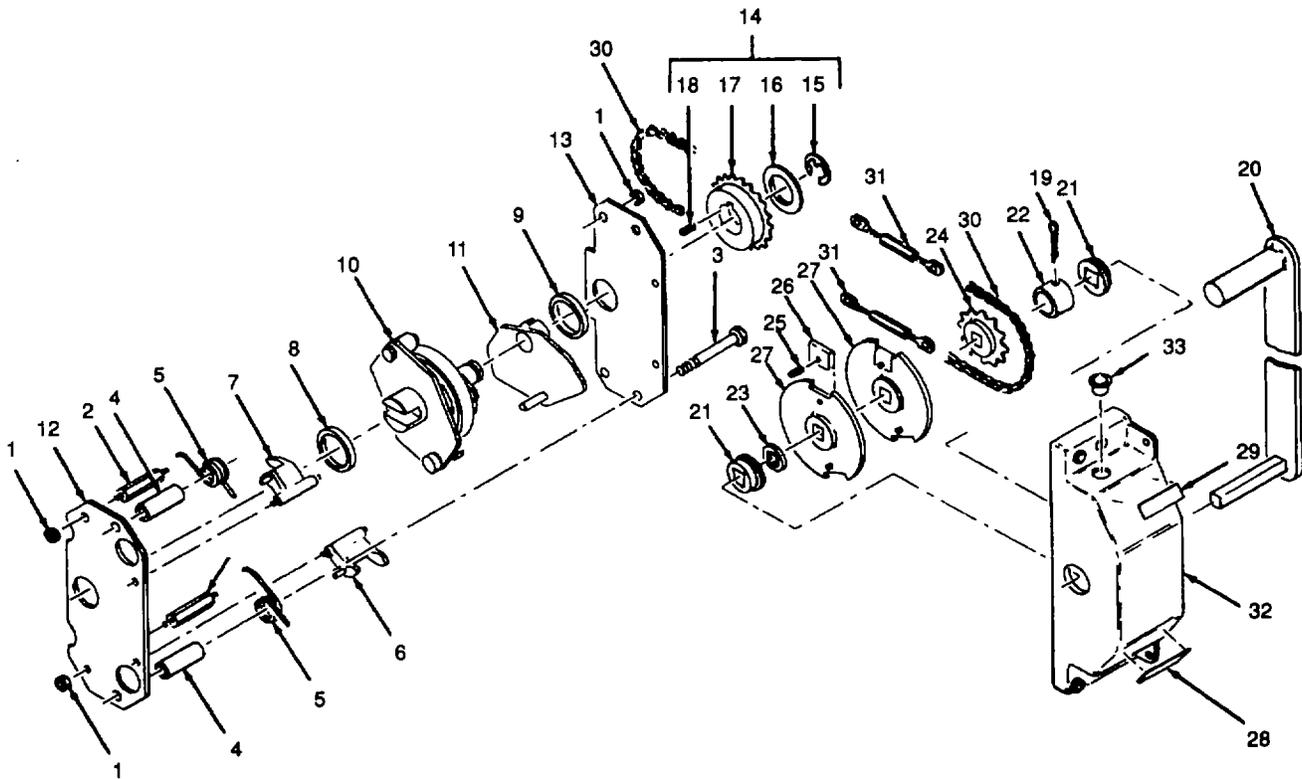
Main Disconnect Switch S120, Operating Mechanism, Exploded View (Sheet 1 of 2)
